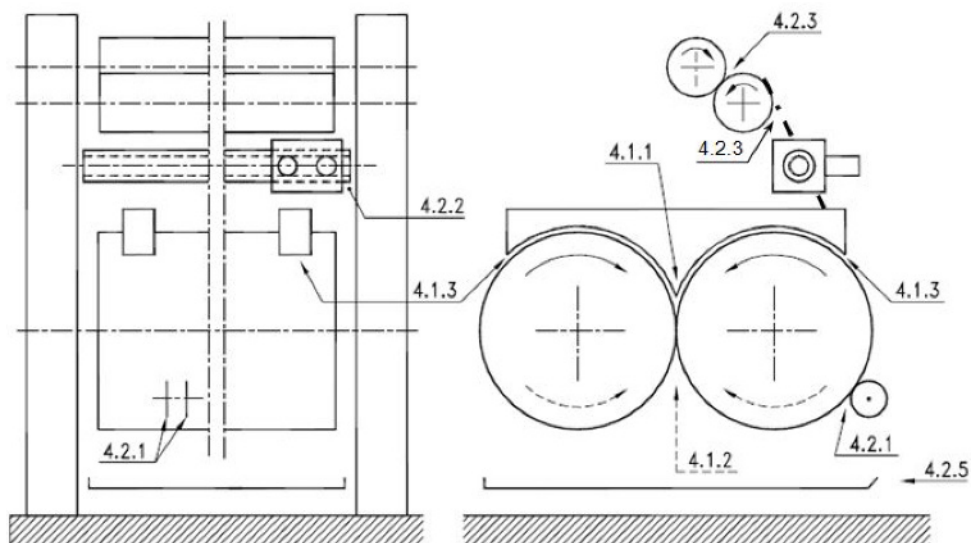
Location of mechanical hazards on a two-roll mill shown with a strip cutting device and a stock blender
